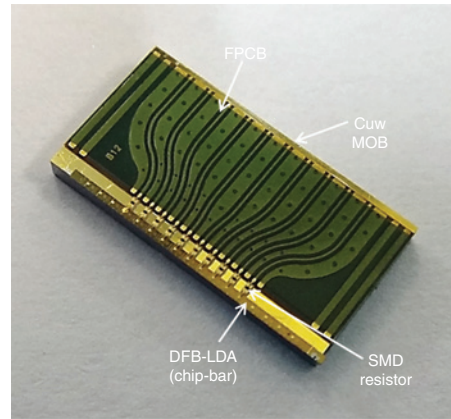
Photograph of sub-assembly module of eight-channel DFB-LDA
